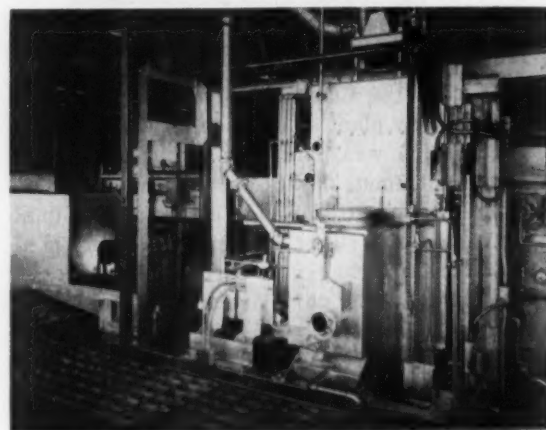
Side view of the discharge end of one carburizing furnace shows the hooded vestibule for handling gears to be press quenched. Trays of quenched parts, left, are entering the washer. In foreground are trays on the return conveyor.
